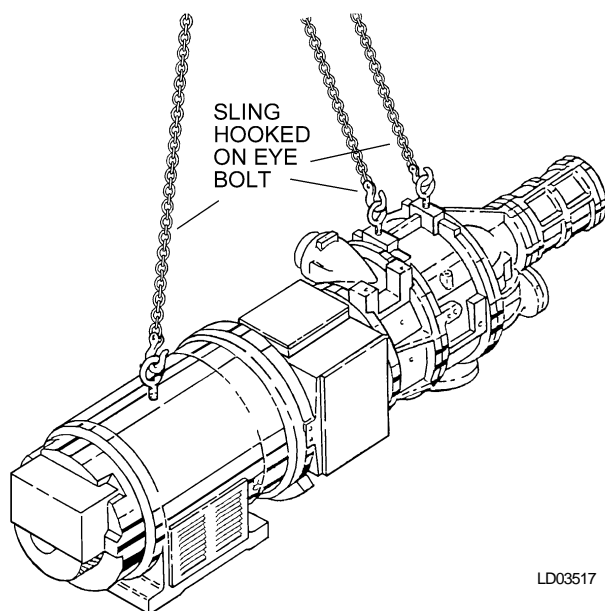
RIGGING COMPRESSOR ASSEMBLY
